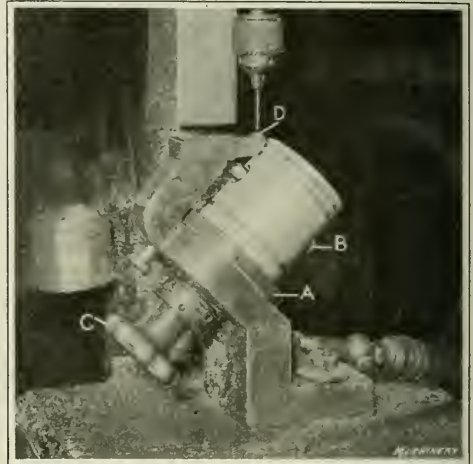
Jig for drilling Two Inclined Oil-holes leading to Wrist-pin Bearings
